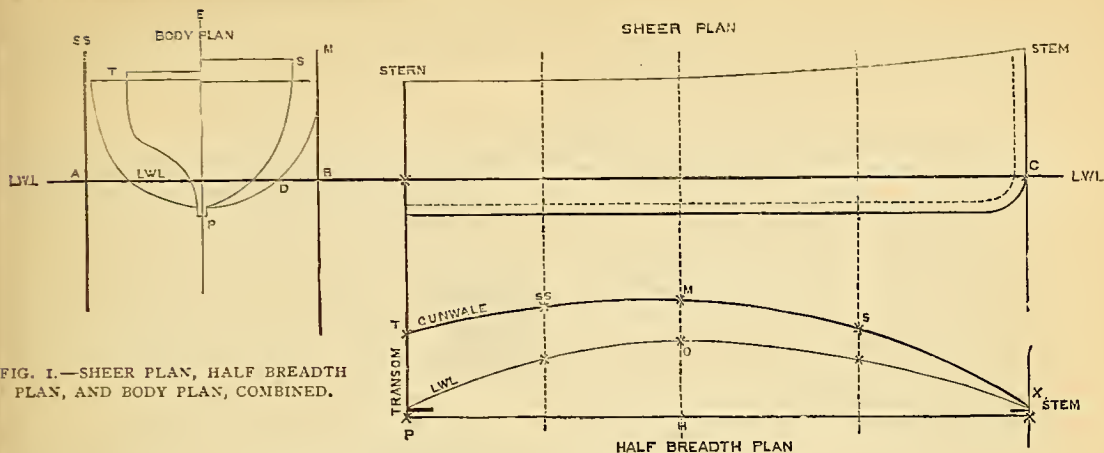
SHEER PLAN, HALF BREADTH PLAN, AND BODY PLAN, COMBINED.
